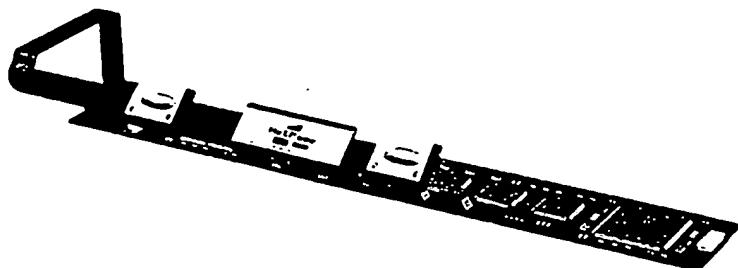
Travelprinter R main and flex PCB, with buttons and segment LCD
